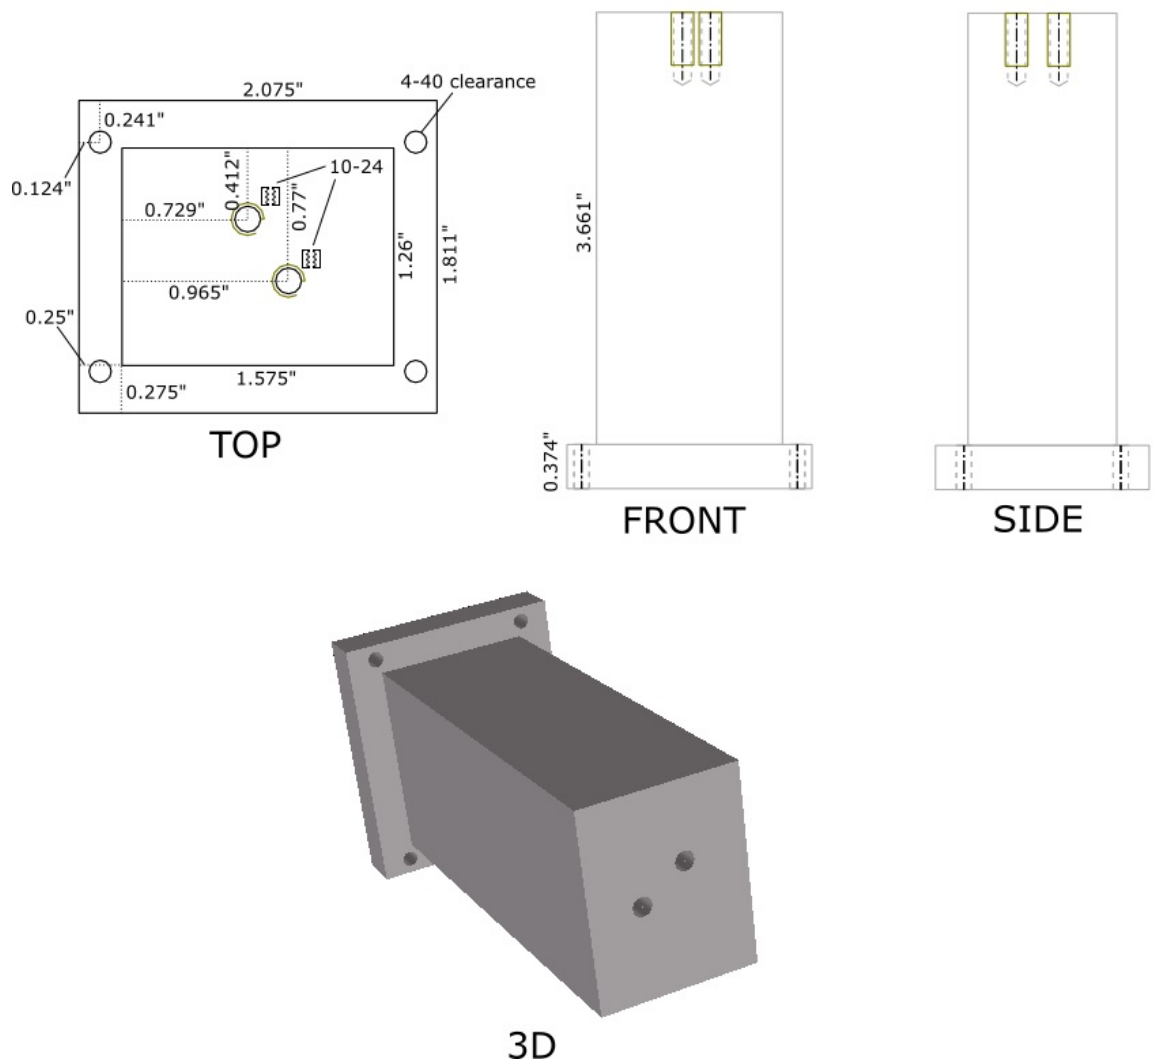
Custom “connector” machined part manufactured by eMachineShop. Connector functions as a heat conductor from one side of a Peltier heat pump to a Wakefield-Vette 401A heat sink affixed via 10-24 holes at the end. Through-holes at base allow connecting to the machined “holder” part housing the vial, with the Peltier element held between the two by compression.
